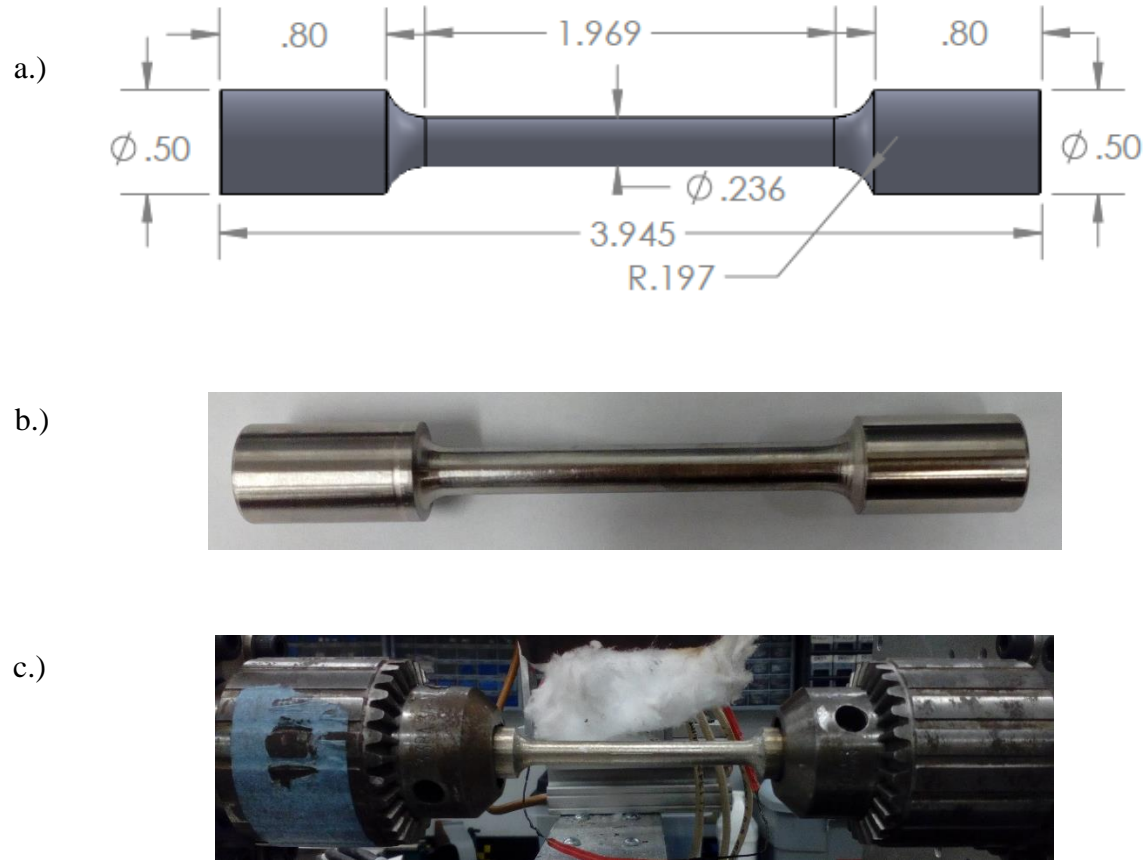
Design of specimen for torsion testing of Inconel 718: a.) geometric dimensions of specimen in inches, b.) test specimen (conventionally manufactured (wrought annealed) Inconel 718), c.) experimental setup of DMLS Inconel 718 within torsion test device
